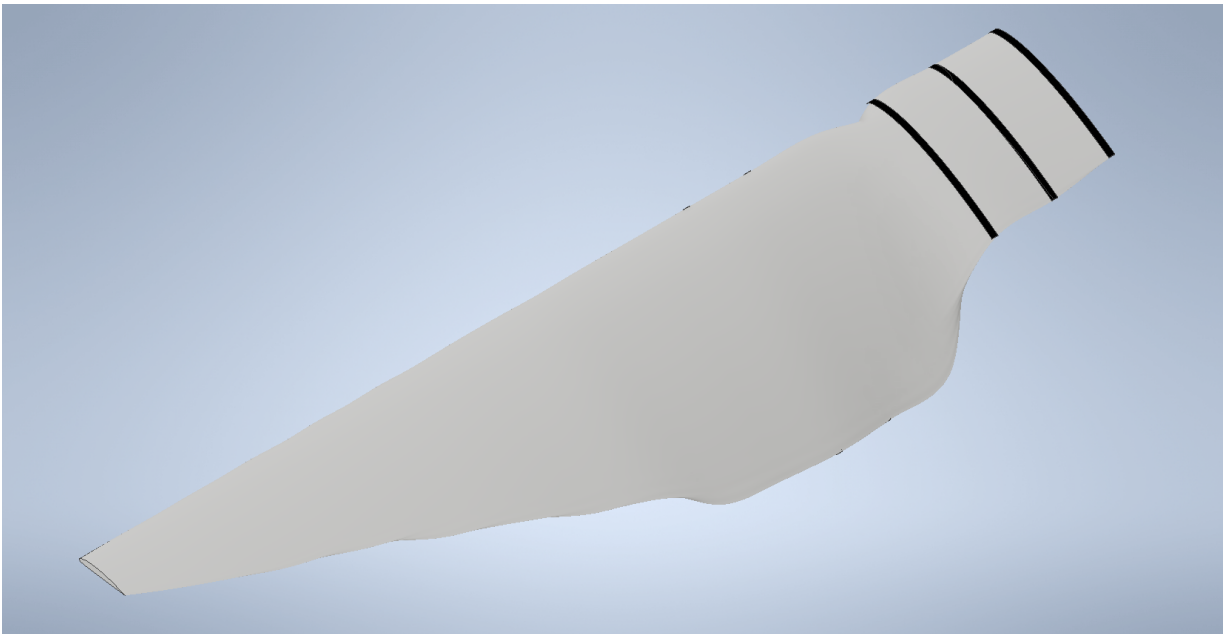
Isometric view showing top side of propeller blade with three actuator strips
